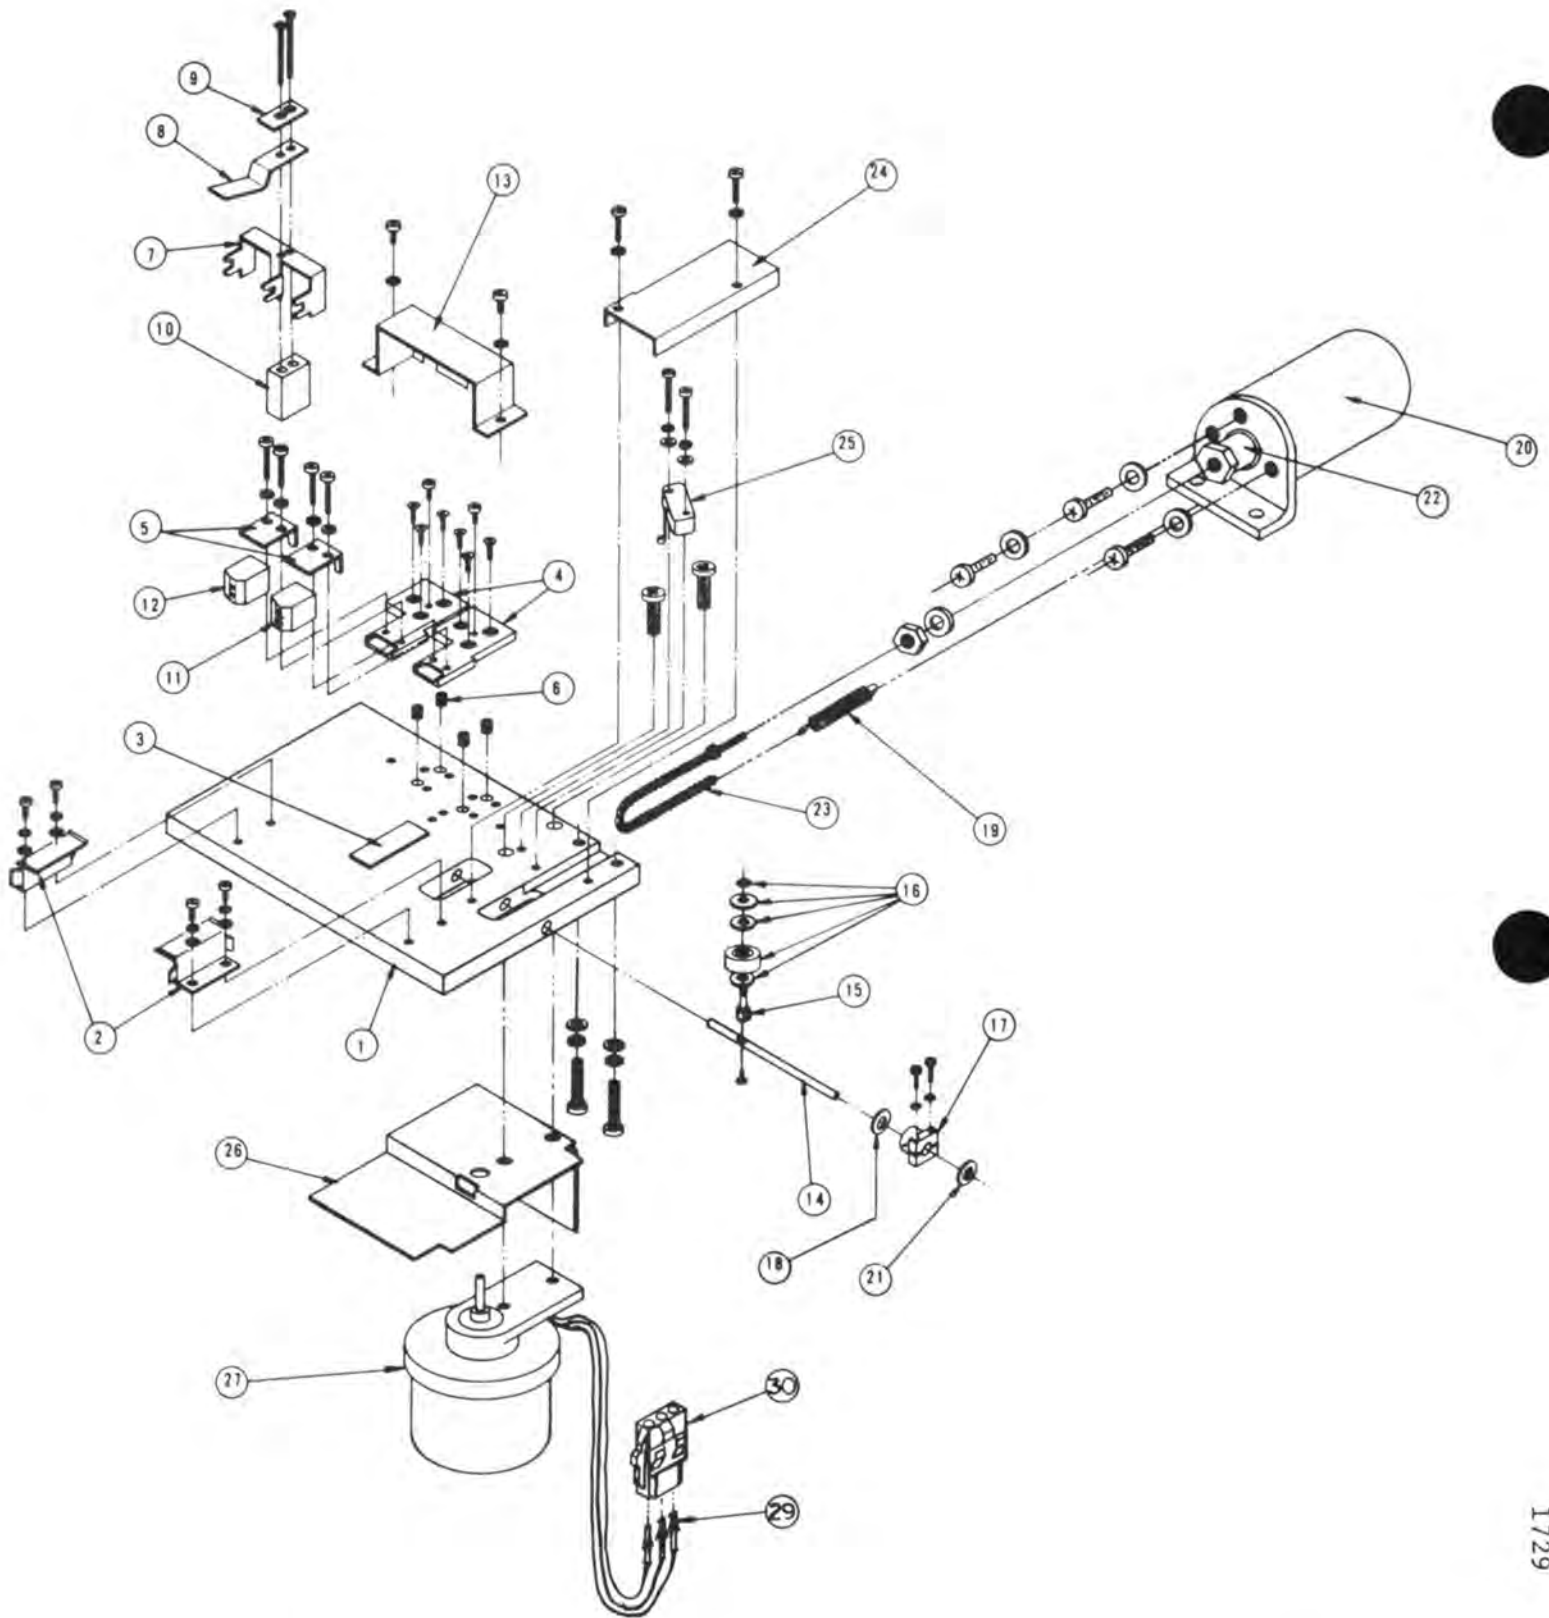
Criterion 90-1 and 90-2 Exploded View - 839 3439 001
